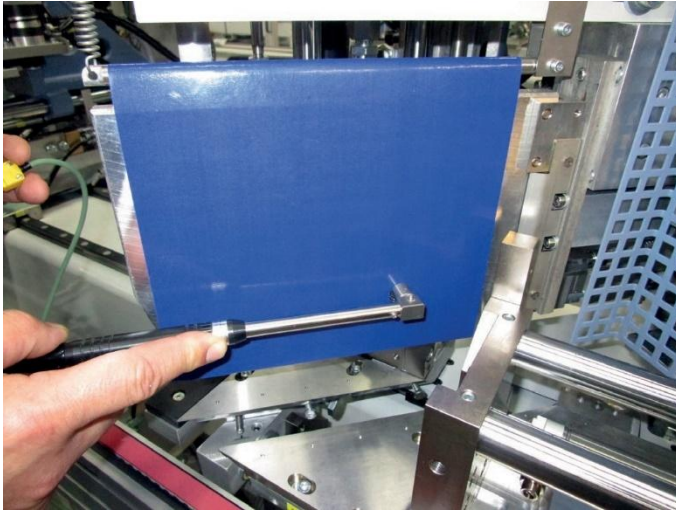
Temperature measurement on the welding mirror using a contact sensor
